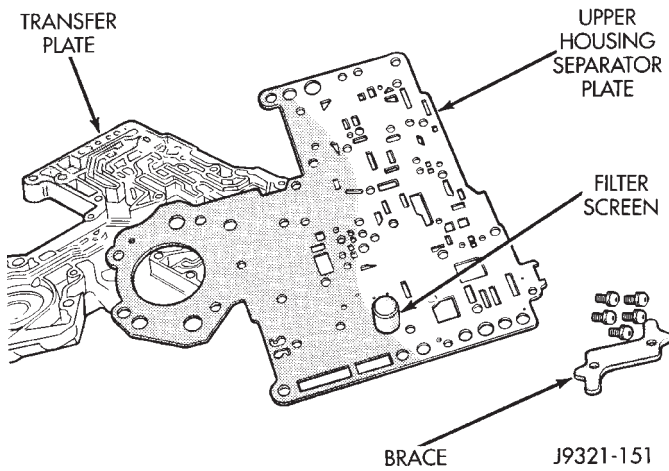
Removing Transfer Plate From Upper Housing (42RH)
